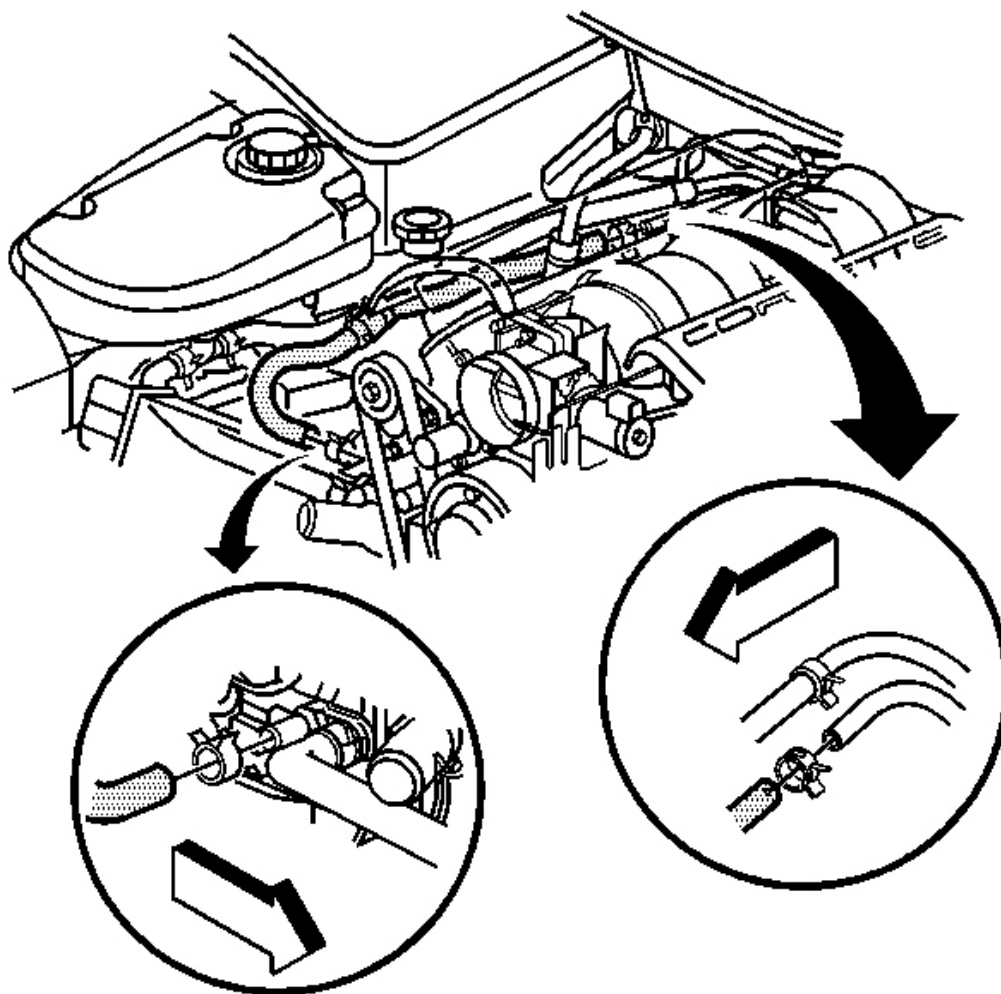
Inlet Heater Hose, Heater Pipe & Coolant Pump
